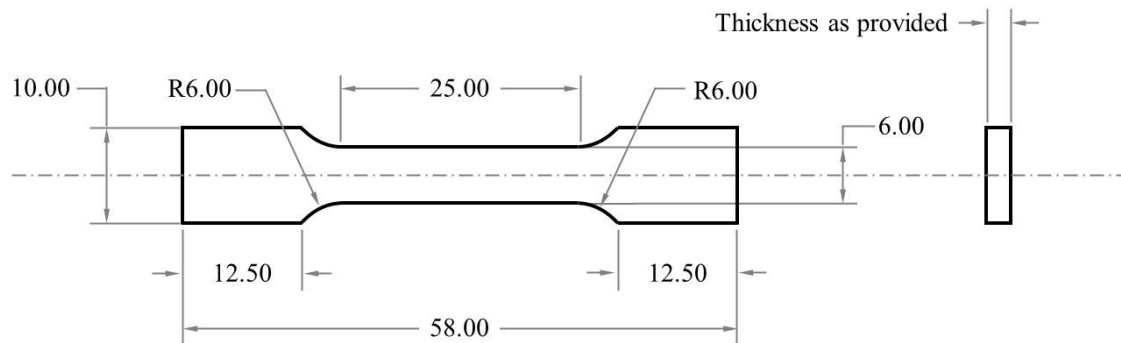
Specimen geometry used for tensile test in this work. All dimensions are reported in millimeters.
